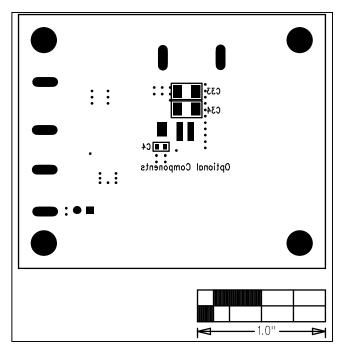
MAXM17516 Component Placement Guide—Solder Side
